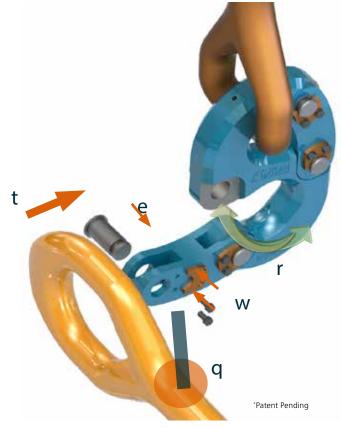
Mounting the Elevator Link to the lower Connector\*s
